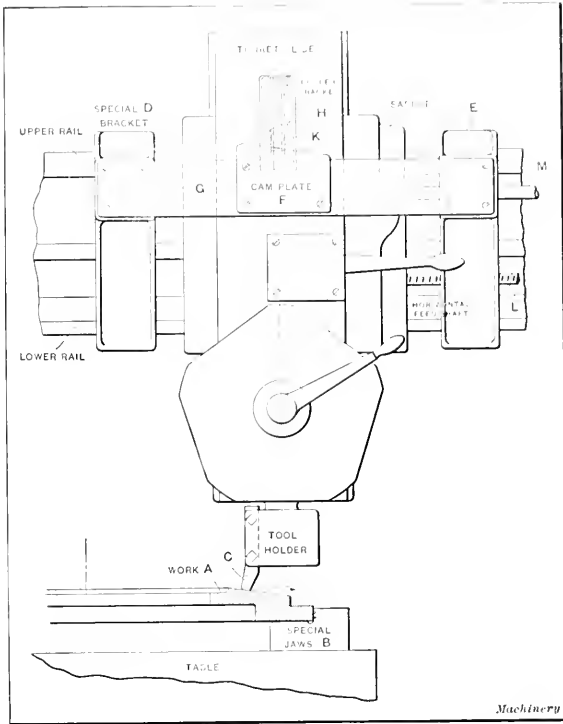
Angular Forming Attachment for a Vertical Boring Mill
